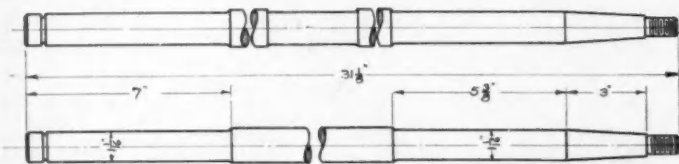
TWO DRAWINGS OF A REAR AXLE THAT IS FINISHED BY GRINDING
